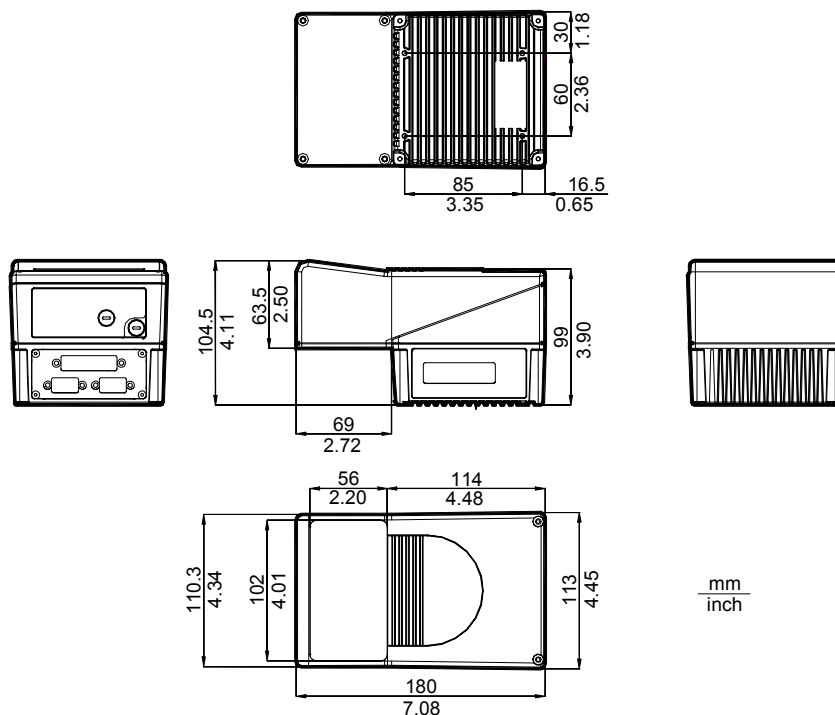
DS6300 Oscillating Mirror Model Overall Dimensions
